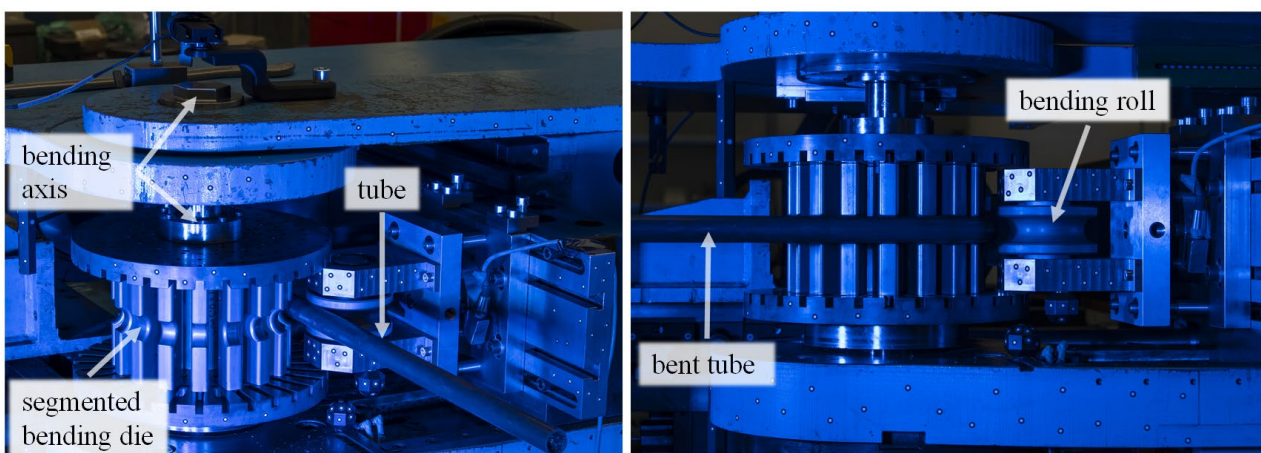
Segmented and adjustable bending die for compression bending [50]
